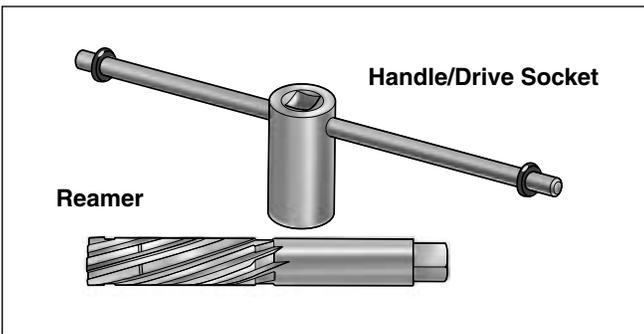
Connecting Rod Bushing Reamer (Part No. HD-42318) and Handle/Drive Socket (Part No. HD-43645)
